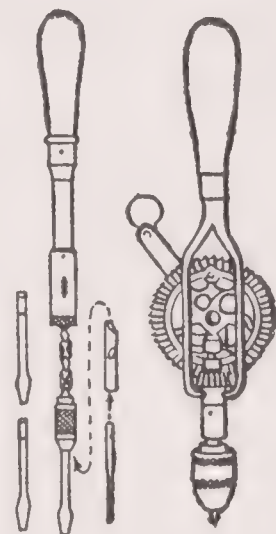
Spiral-ratchet Screw-Driver. FIG. 26. Hand Drill.
